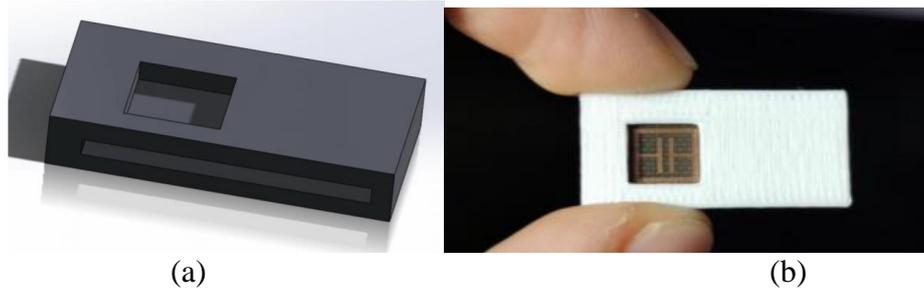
RFID sensor enclosure. (a) 3D CAD design. (b) Prototype.
